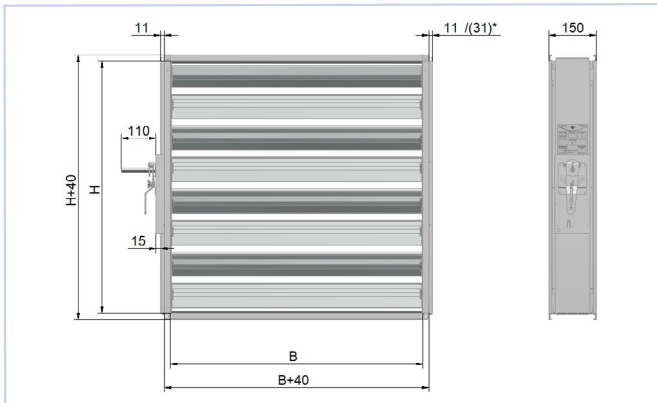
Dimensions TSK-4 with guide spigot (\*height  $\geq 1200 \text{ mm}$ )
